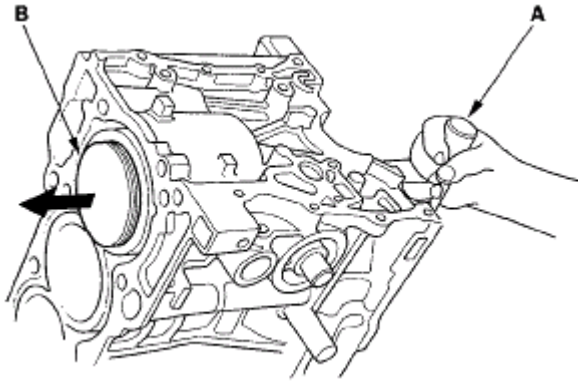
Driving Out Piston/Connecting Rod Assembly
